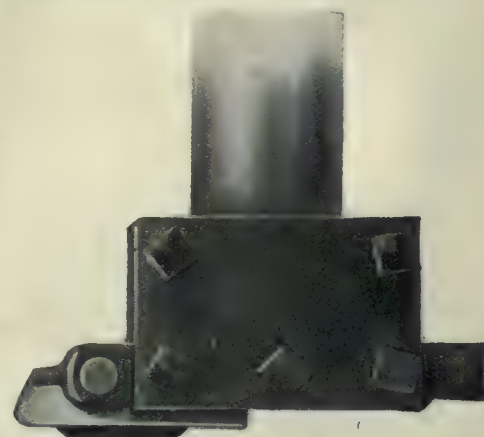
Right Hand Tool Holder for Boring Mills.
